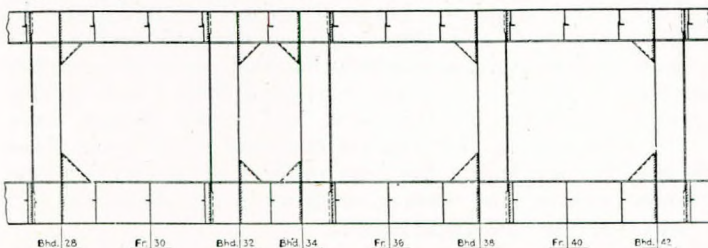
Vertical keel and centre deck girder. Shaded lines indicate field welds.
